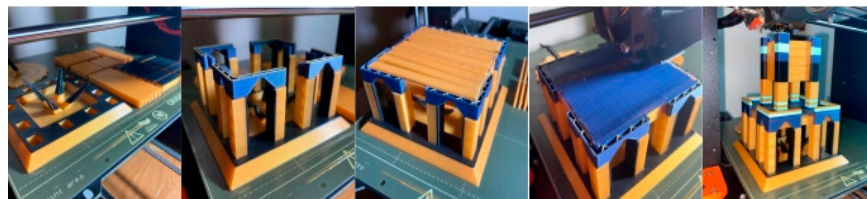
In this example the columns were also printed and placed in the consequent places at the bottom of the base and then the beams connecting them were printed on top. Slab supports, wall infills were also printed and mounted while printing process was consequently paused and resumed. Designed and printed by the author of the paper.
